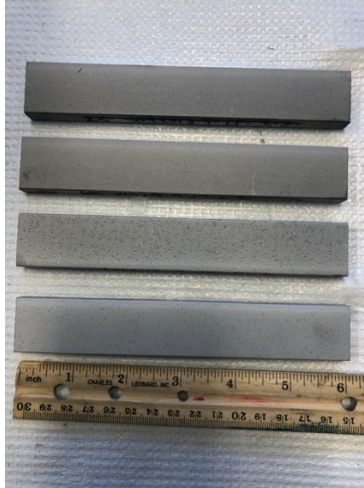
Four As-Sprayed Coatings Prior to Mechanical or Corrosion Testing
